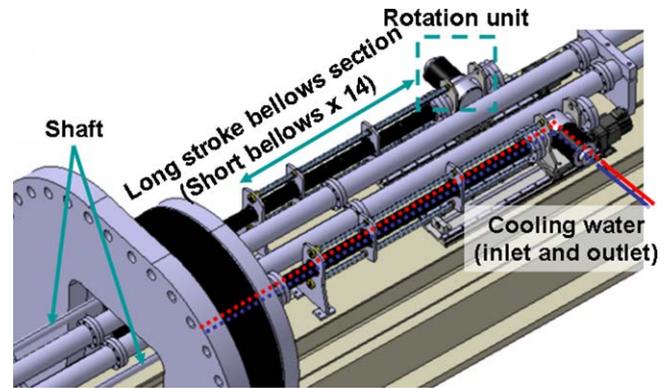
Schematic view of the steering mechanism. A rigid shaft connected to the M1, which includes cooling water lines (inlet and outlet), is contained in the long-stroke bellows section and bended at the rotation unit.
